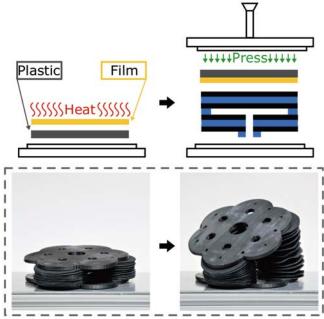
Manufacturing process with Fastel film to bond soft and rough rigid surfaces. Here, a 3D printed plate is bonded to three bellows structures next to each other. The structure shown is one of the actuated segments in the robotic arm in Figures 1 and 13.
